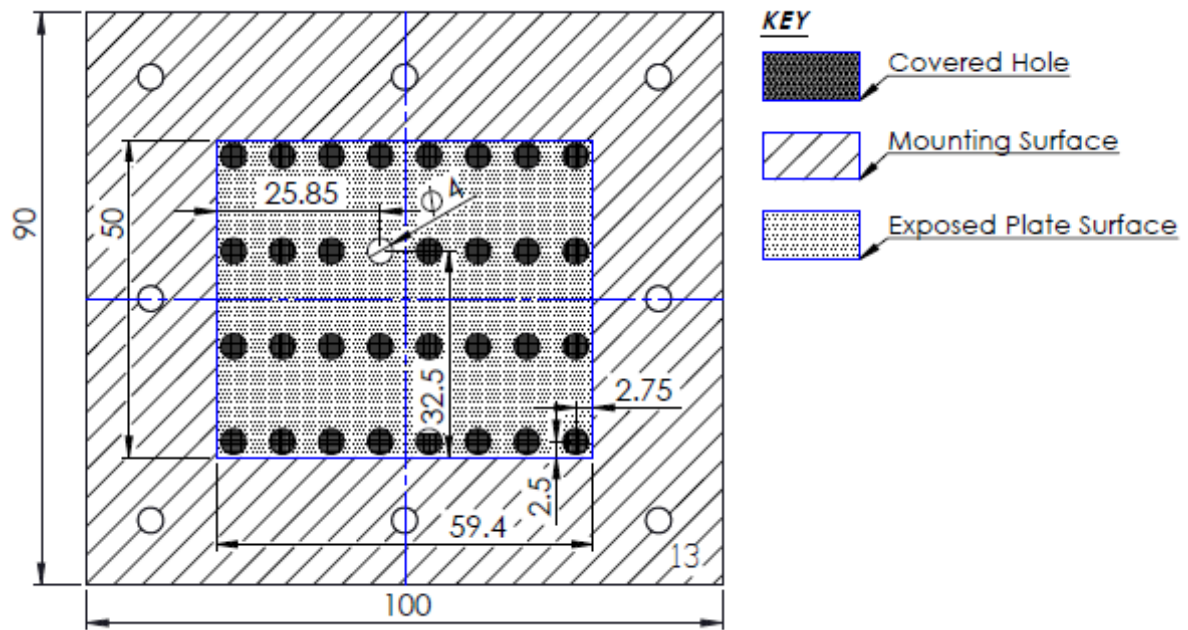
Engineering drawing detailing the inner plate #13 single hole configuration
